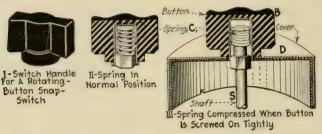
Showing one method of holding cover snugly to the base. (Hart Mfg. Co.)
